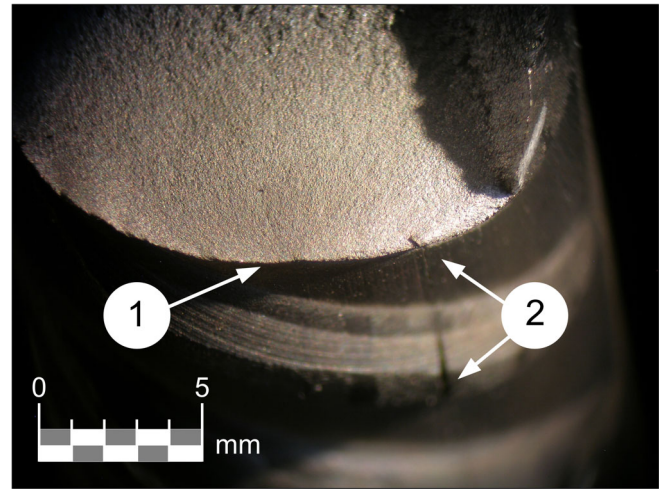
Close up of crack face (1: origin of failure; 2: surface defect without impact on failure)
